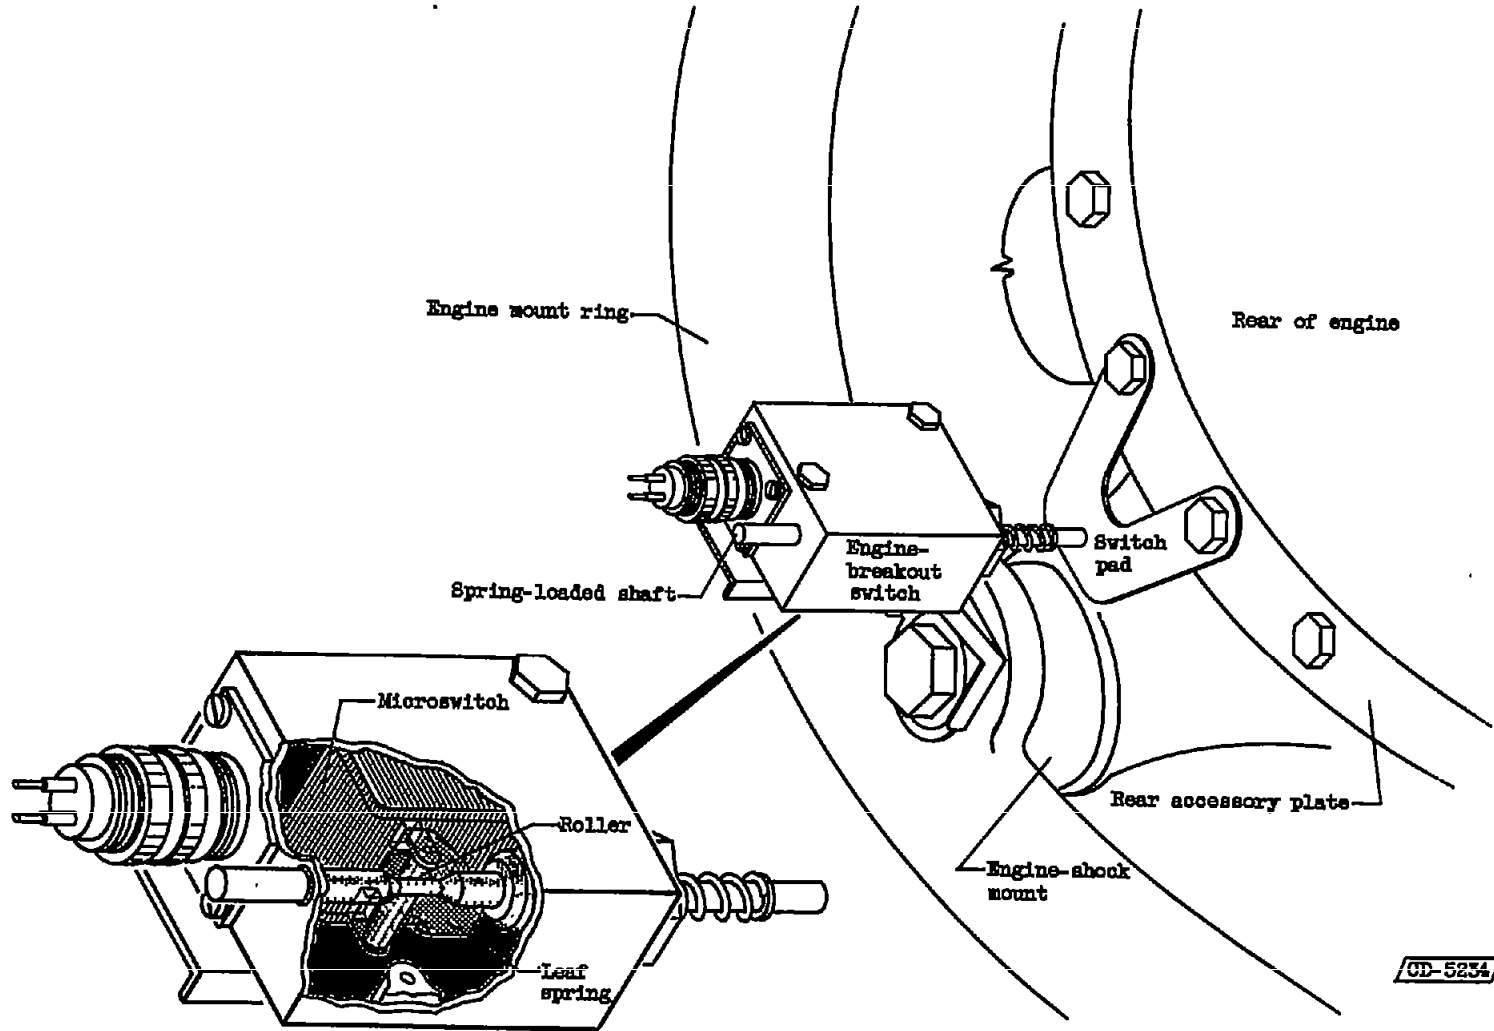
Switch installed between engine mounting ring and engine to detect engine breakout.
